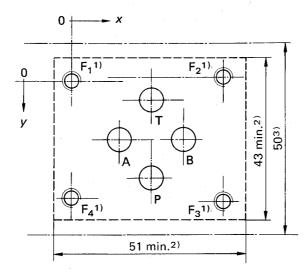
Mounting surface for four-port hydraulic directional control valves with 6,3 mm maximum port diameter
